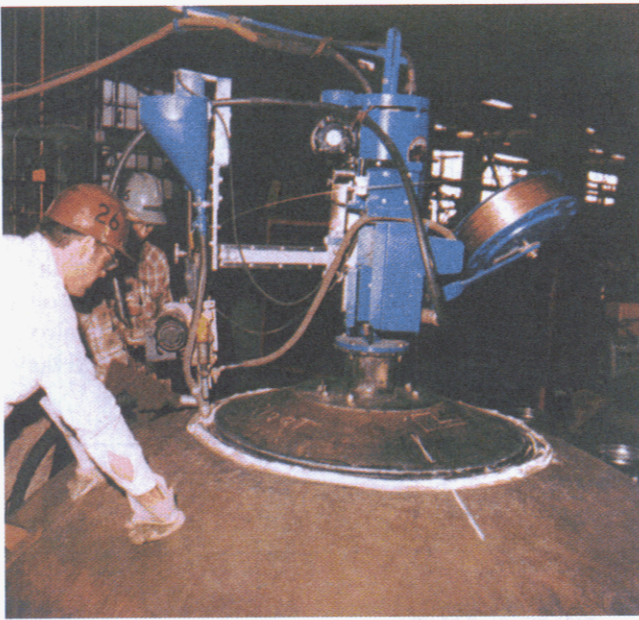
Mechanized Submerged Arc Weld Made on a Vessel Head
